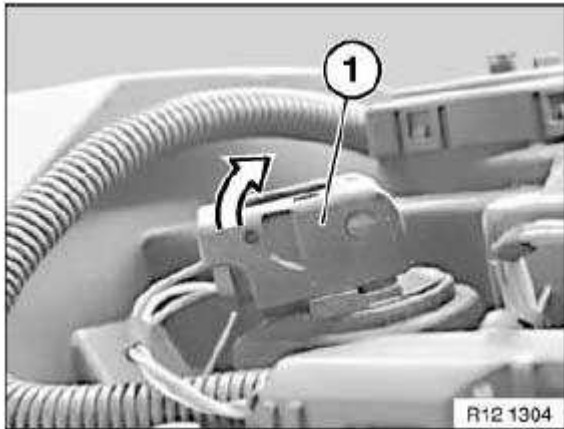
Identifying Plug Fastener Of Ignition Coil
